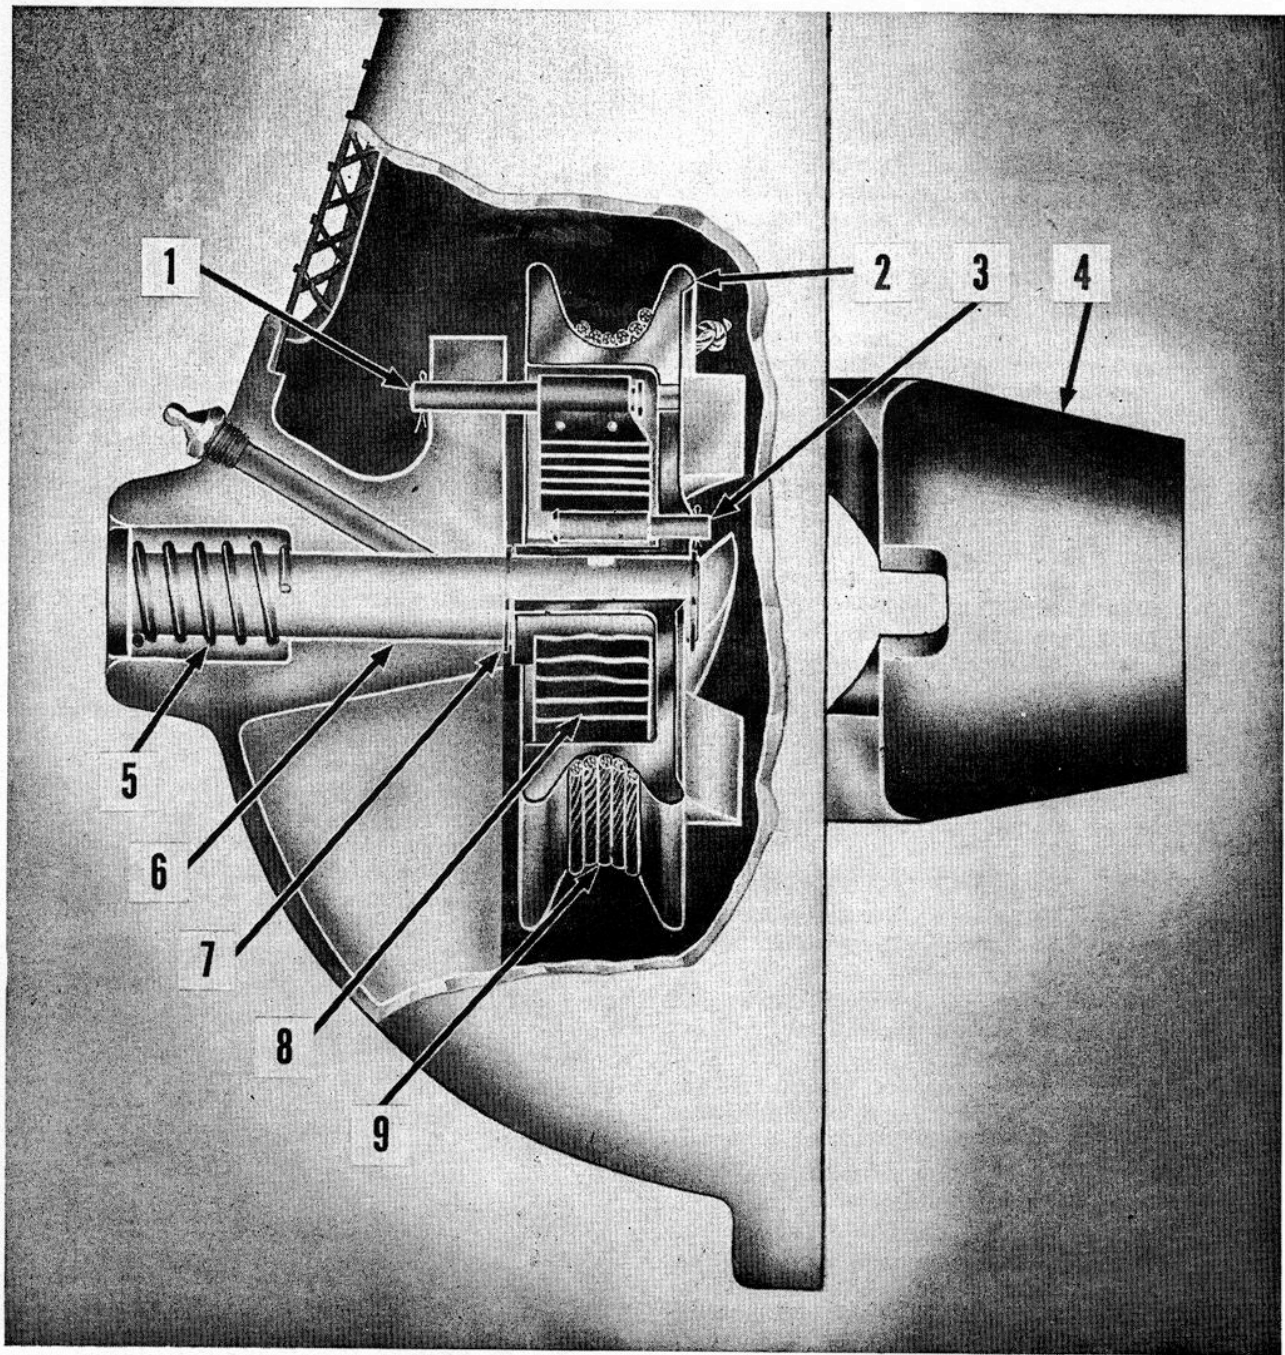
SECTIONAL VIEW OF STARTING ASSEMBLY
